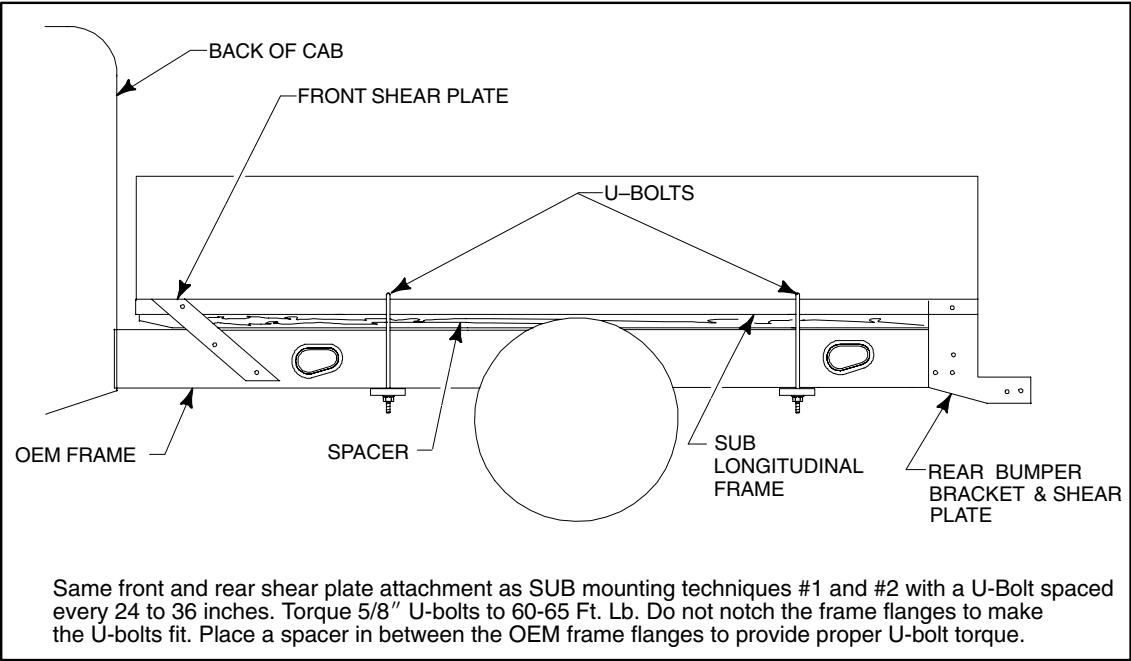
FIGURE E - SUPER DUTY F-SERIES SUB MOUNTING TECHNIQUE #4 FOR 60", 84", AND 120" CA CHASSIS CABS.
